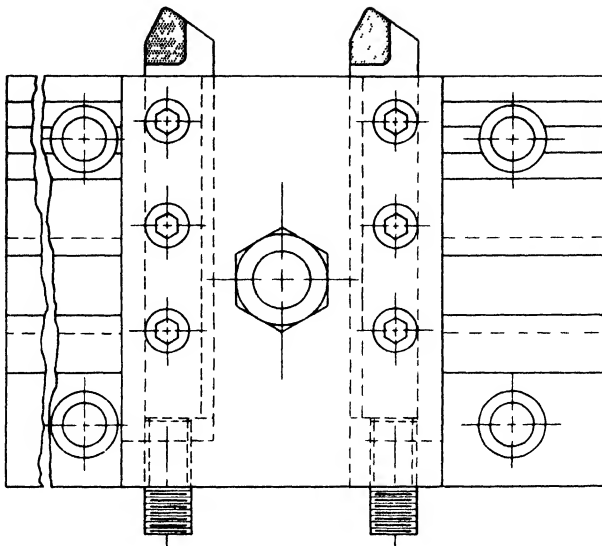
A Block-Type Tool Holder for a Multiple-Point Setup
